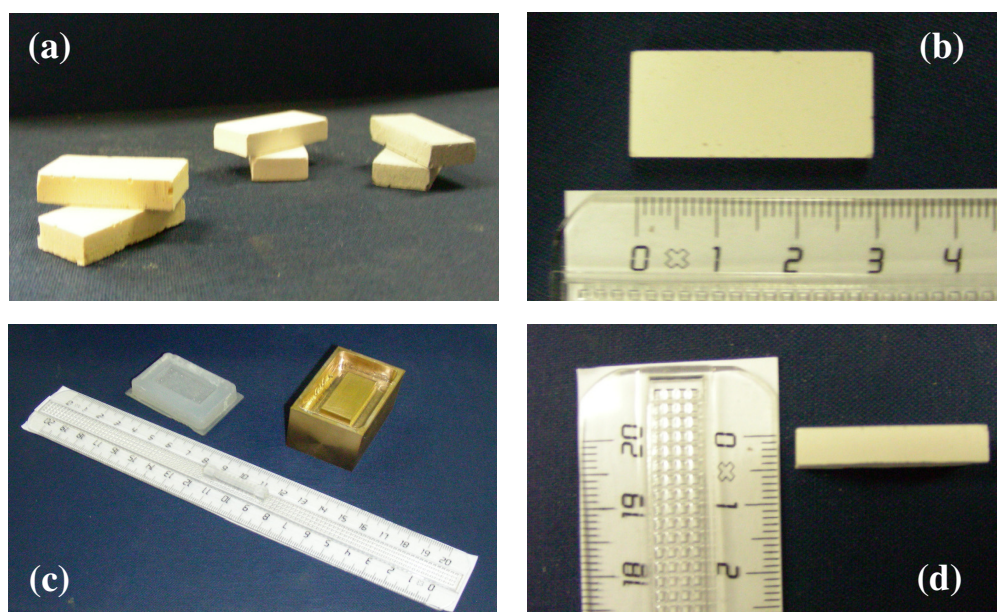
Preparation of the alumina platelets; (a),(b),(d): platelets shape and dimension; (c) mould used in the preparation.
